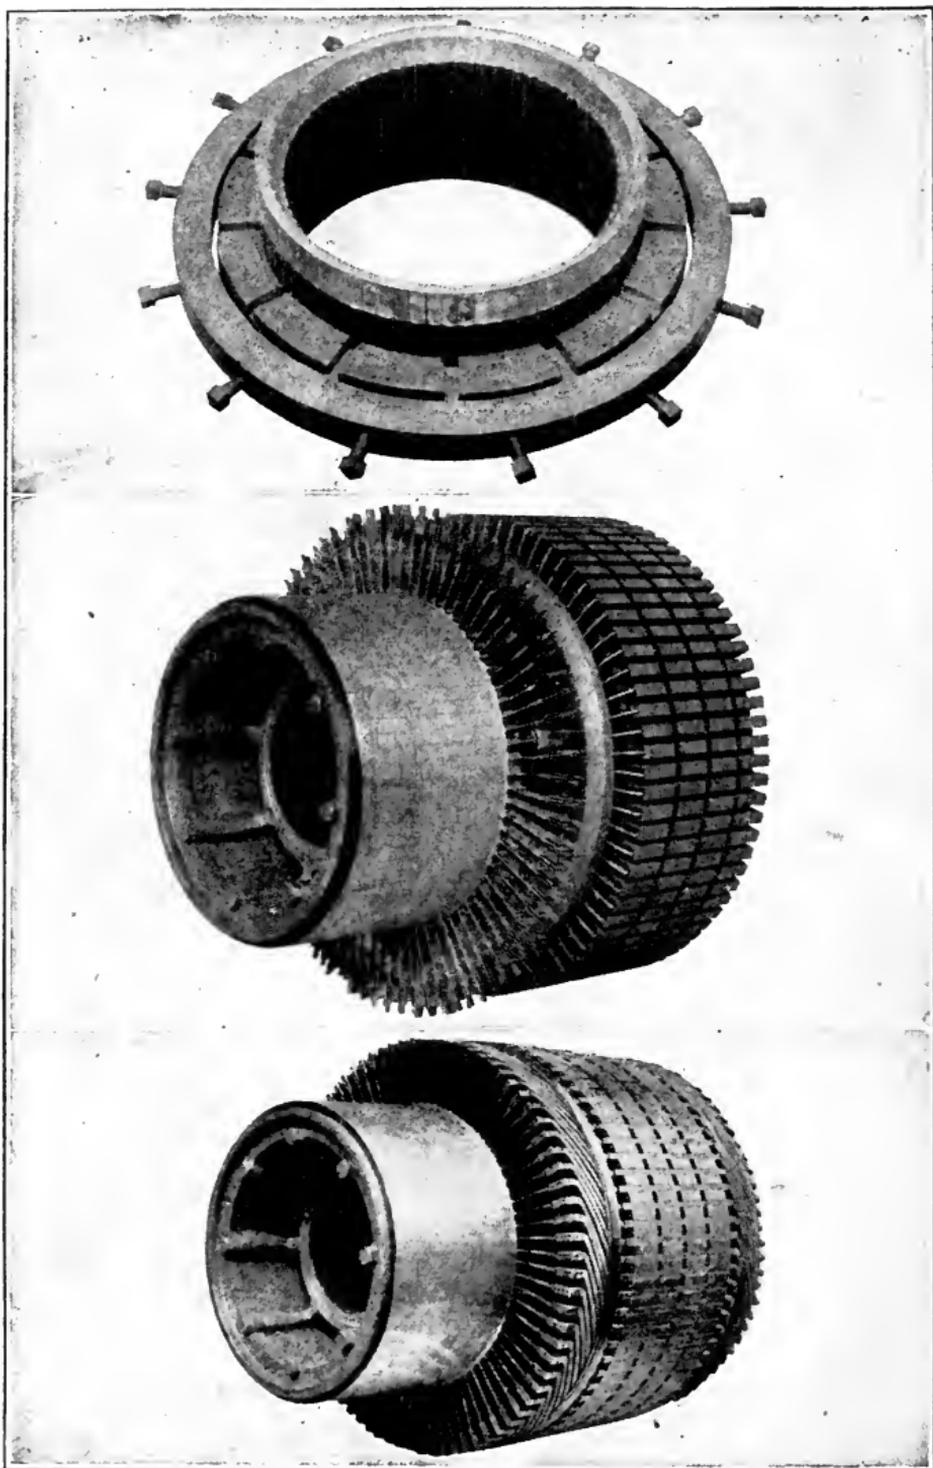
(upper)—Method of assembling commutator segments. FIG. 115 (middle)—Commutator and armature core assembled showing risers. FIG. 116 (lower)—Armature complete with windings connected to risers.
